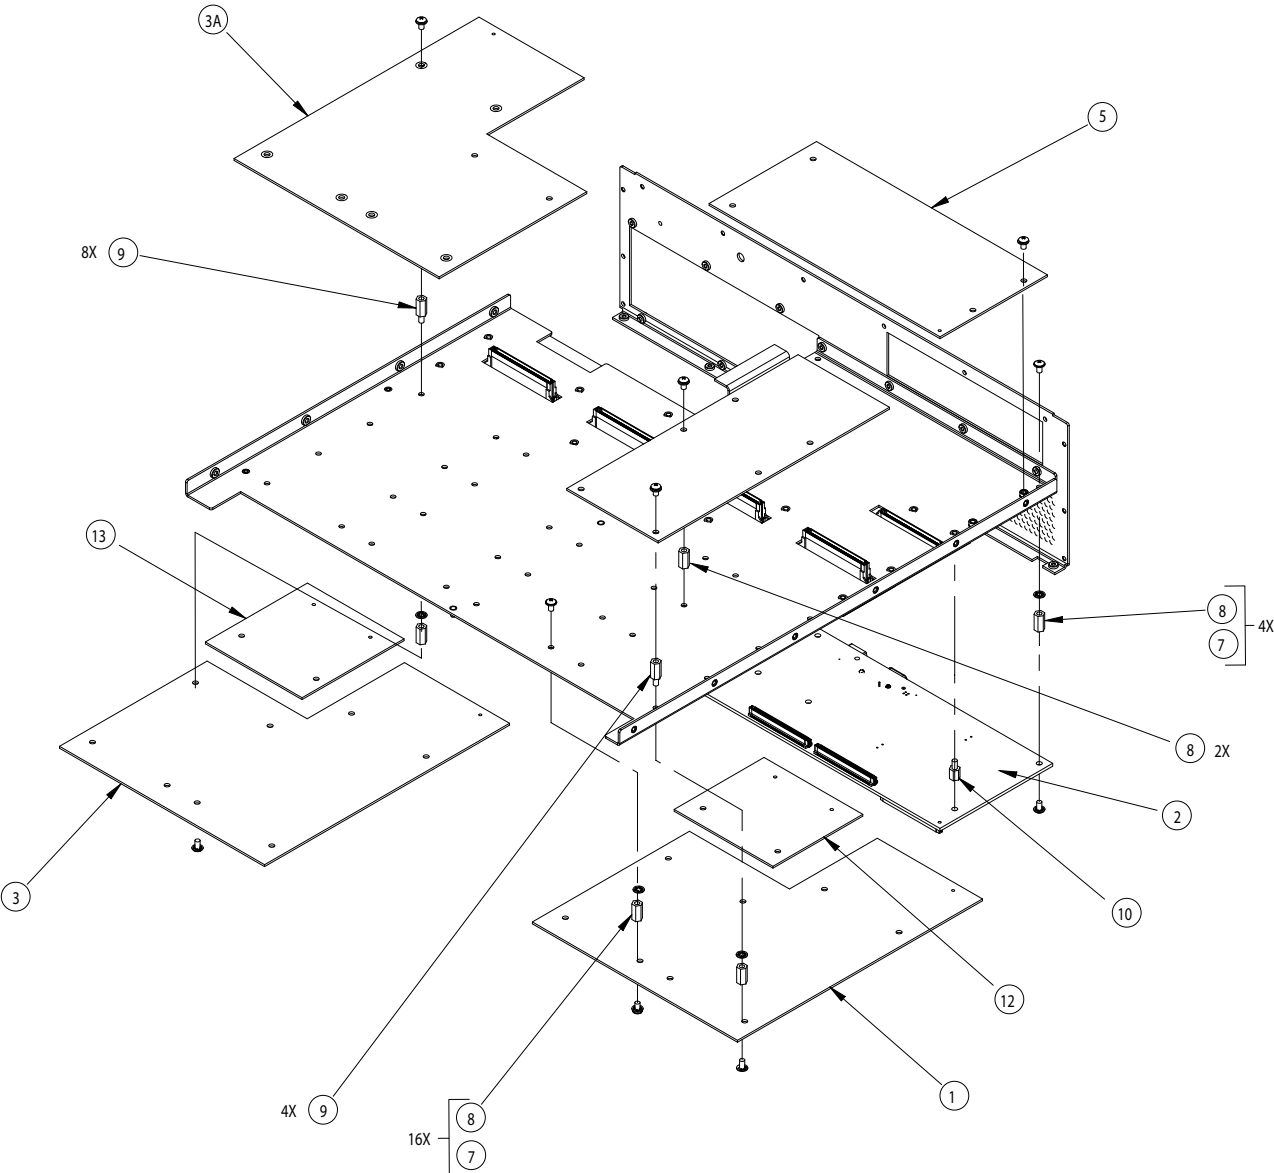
Circuit Boards (bottom view) (APx525/526)
